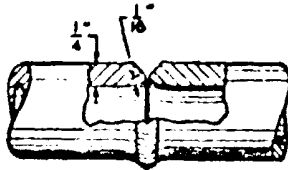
Butt joint for pipe over 1/2 in. wall thickness
